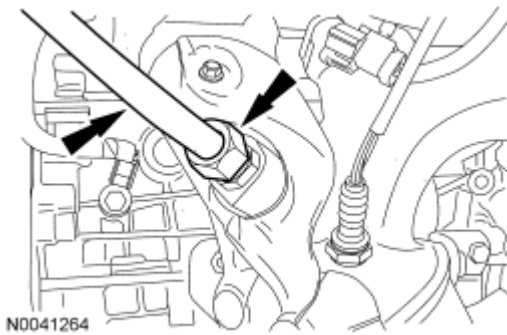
Locating EGR Tube-To-Catalytic Converter Nut And EGR Tube
